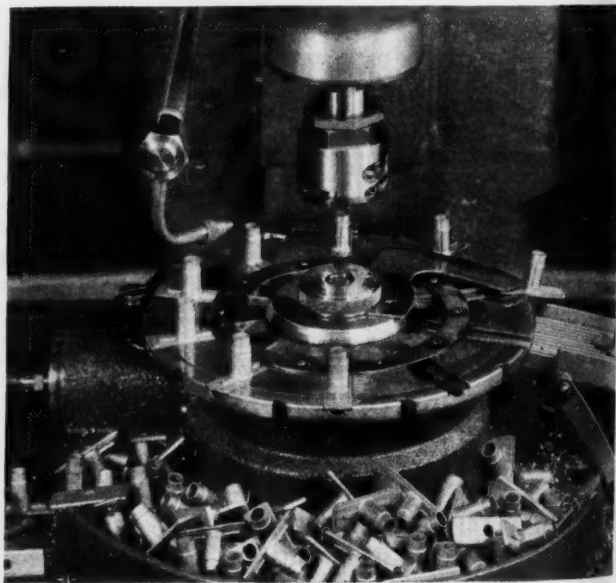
With the aid of this air-controlled automatic dial-feeding fixture, an external thread $\frac{1}{2}$ inch long is cut in $1\frac{1}{4}$ seconds, or at a rate of 2,000 pieces per hour.
